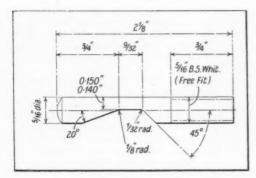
Principal Dimensions of the Cotterpins Which are Machined at the Rate of 160 per hour on the Set-up in Fig. 4
